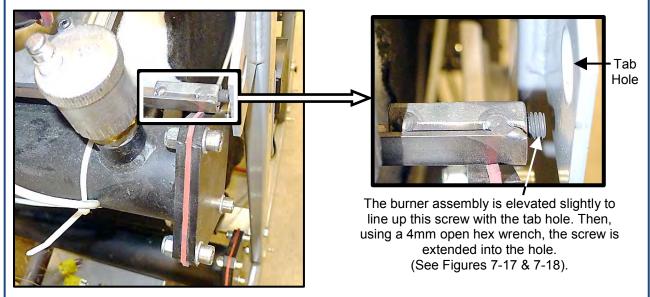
Location of Burner Assembly Lifting Screw (Step 14)
